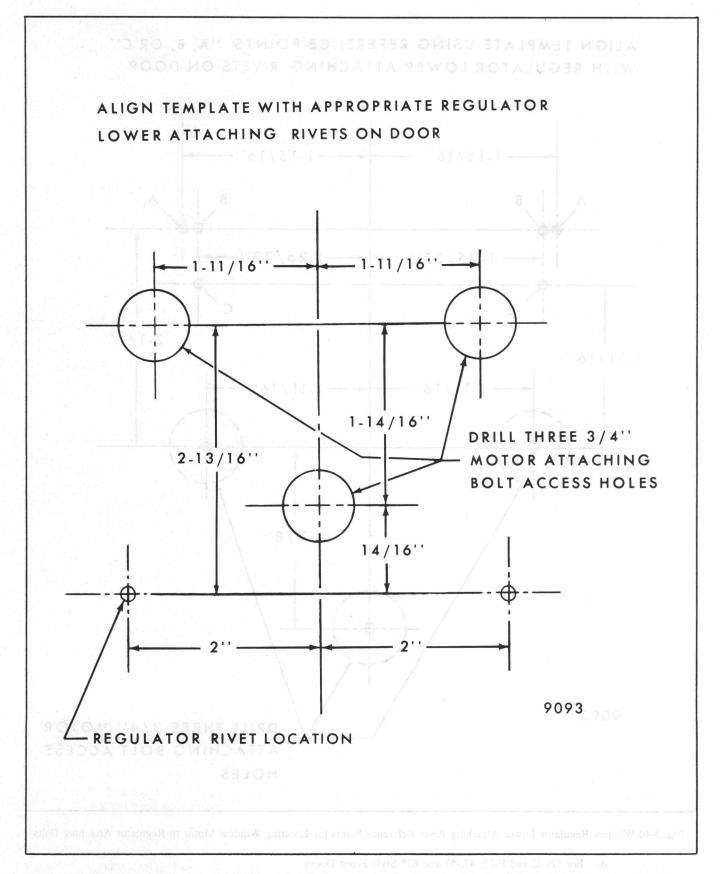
Window Regulator Lower Attaching Rivet Reference Points for Locating Window Motor to Regulator Attaching Bolts
